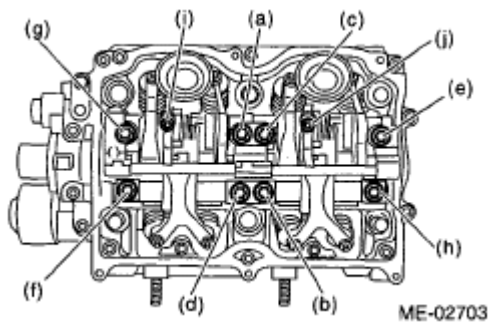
Identifying Tightening Sequence Of Valve Rocker Assembly Bolts
